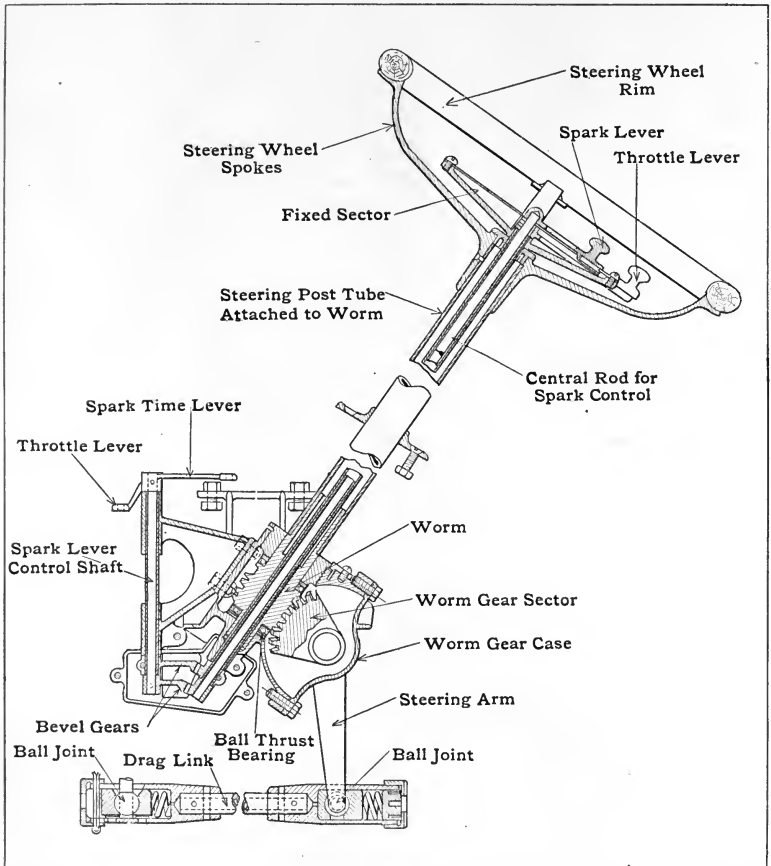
Typical Steering Post Assembly Showing Hand Wheel and Motor Controlling Levers. Sectional View of Worm and Worm Wheel and Steering Arm Connecting Member.
